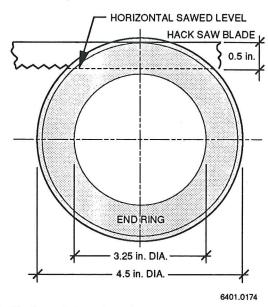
One end of rotor bars of the sample motor is partially sawed
